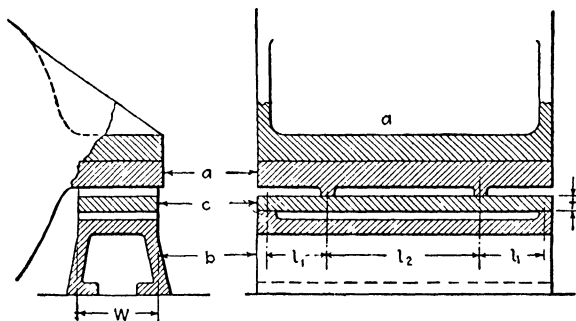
Detail of beam spring for machine of Fig. 54.
